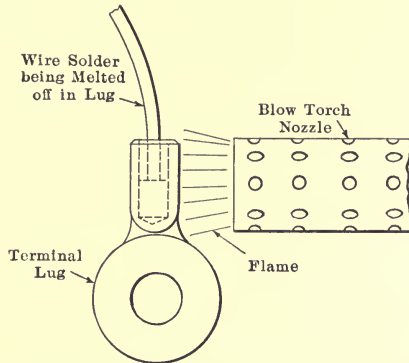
MAKING JOINT WITH BLOW TORCH AND SOLDER WIRE.
